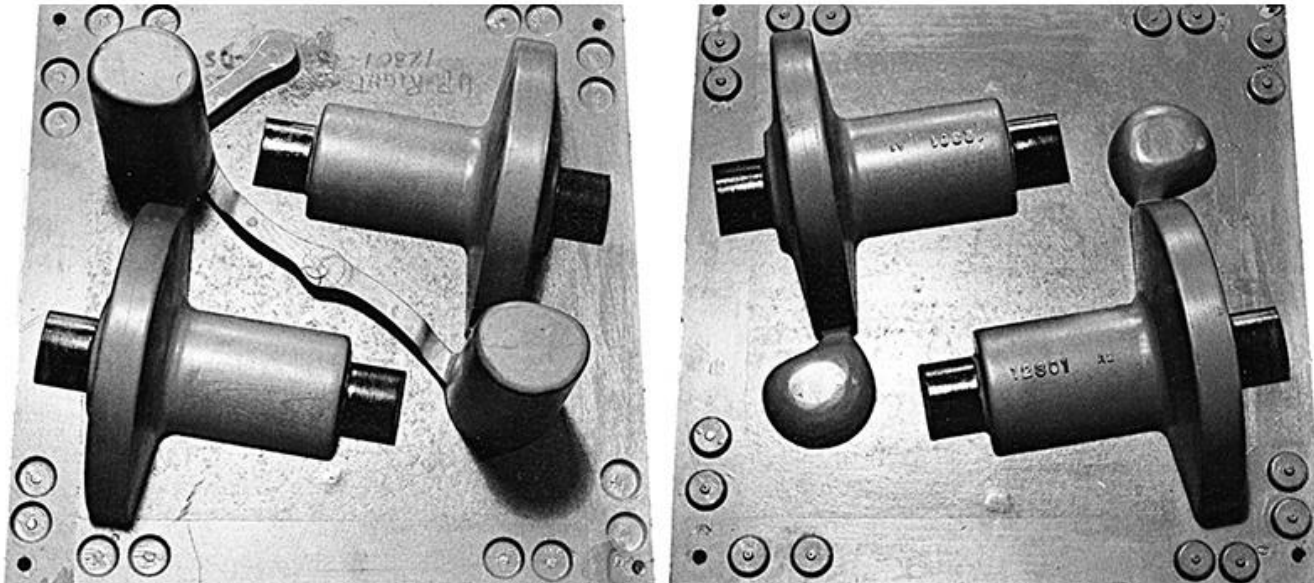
Cope-and-drag pattern for producing two heavy parts. (Left) Cope section; (right) drag section. (Note: These are two separate pattern boards.)
